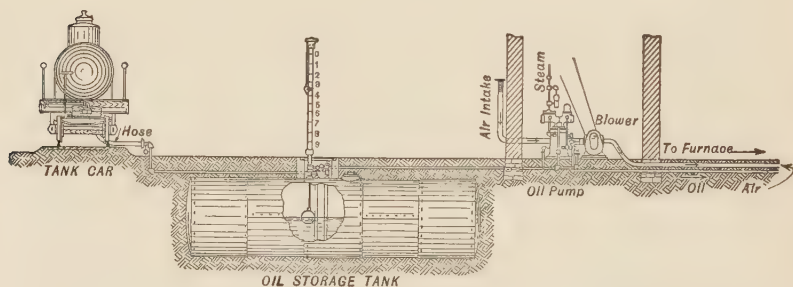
Auxiliary equipment for oil-burning furnaces. Additional equipment is needed for heavy, viscous oils.
